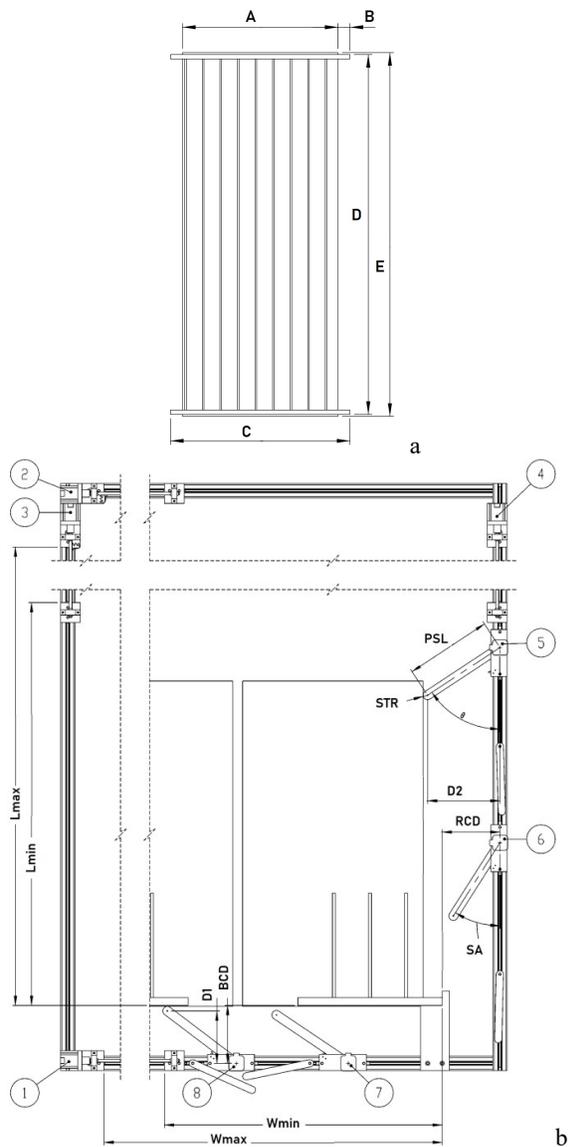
a – Typical product dimensions needed to configure the fixture (A – panel width, B – header exit length, C – grid width, D – grid length, E – panel length); b – required geometrical properties of the fixture (motors numbered 1 to 8).
